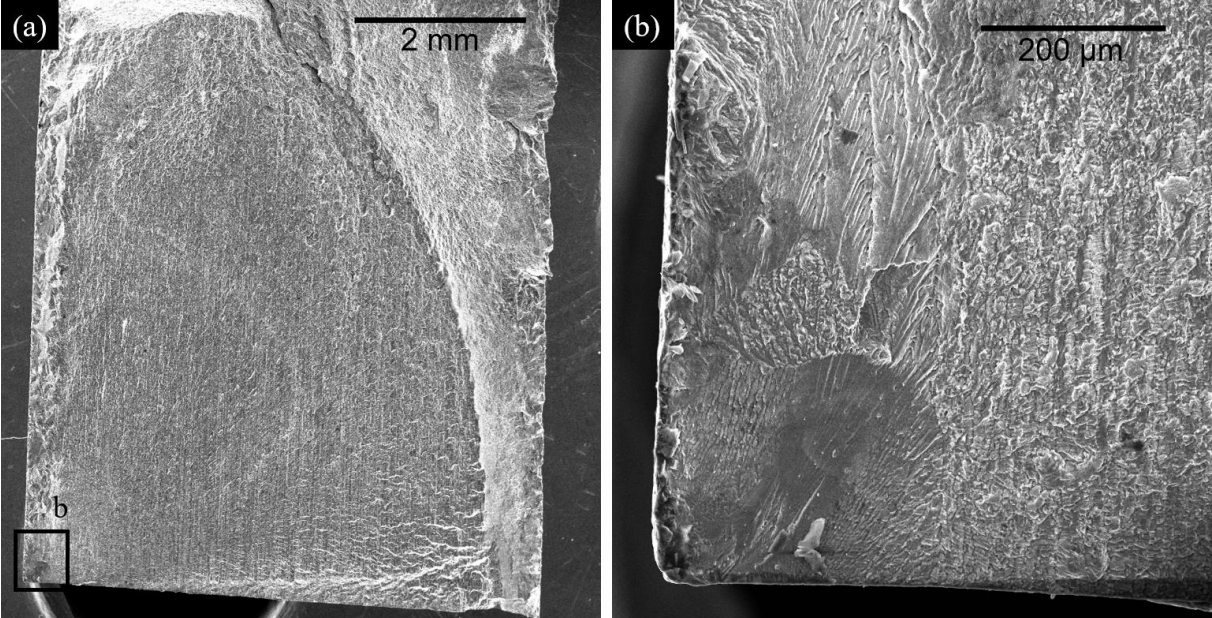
Fracture surface of uncorroded glass bead blasted specimen.
